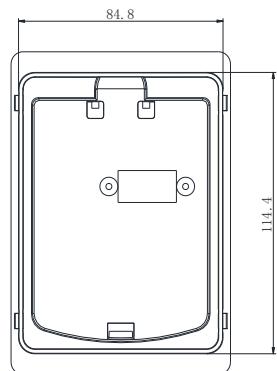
External lead keyboard 1 mounting base opening dimensions
